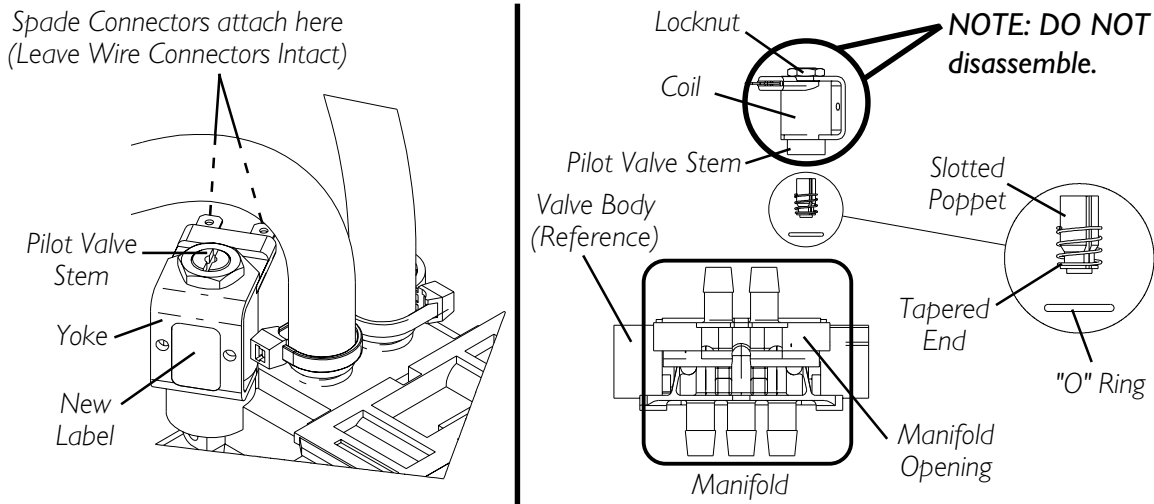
REMOVING/INSTALLING PILOT VALVE POPPETS AND "O" RINGS
